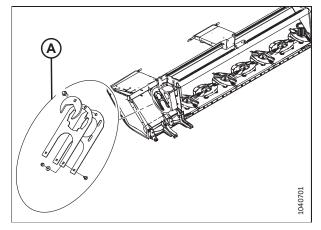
Disc Timing Tool Location – Left Rear Side
